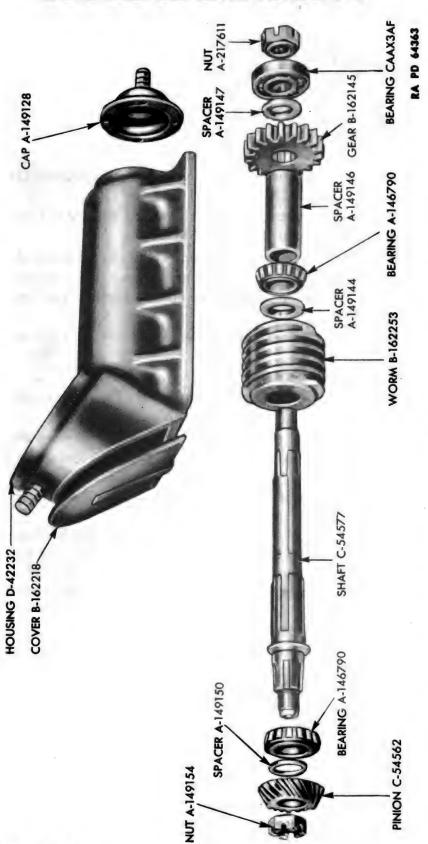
Elevating Mechanism Worm Assembly—Exploded View
